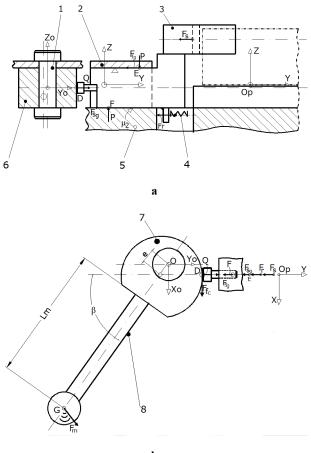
Fixing mechanism with eccentric cam and guiding jaw:
